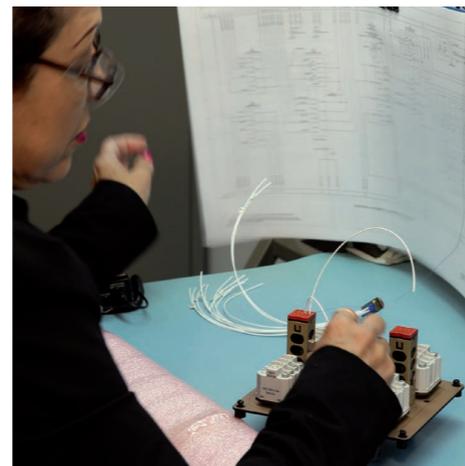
Plug-In Mounting Sleeve with Connector and Plug-In Mounting Sleeve
